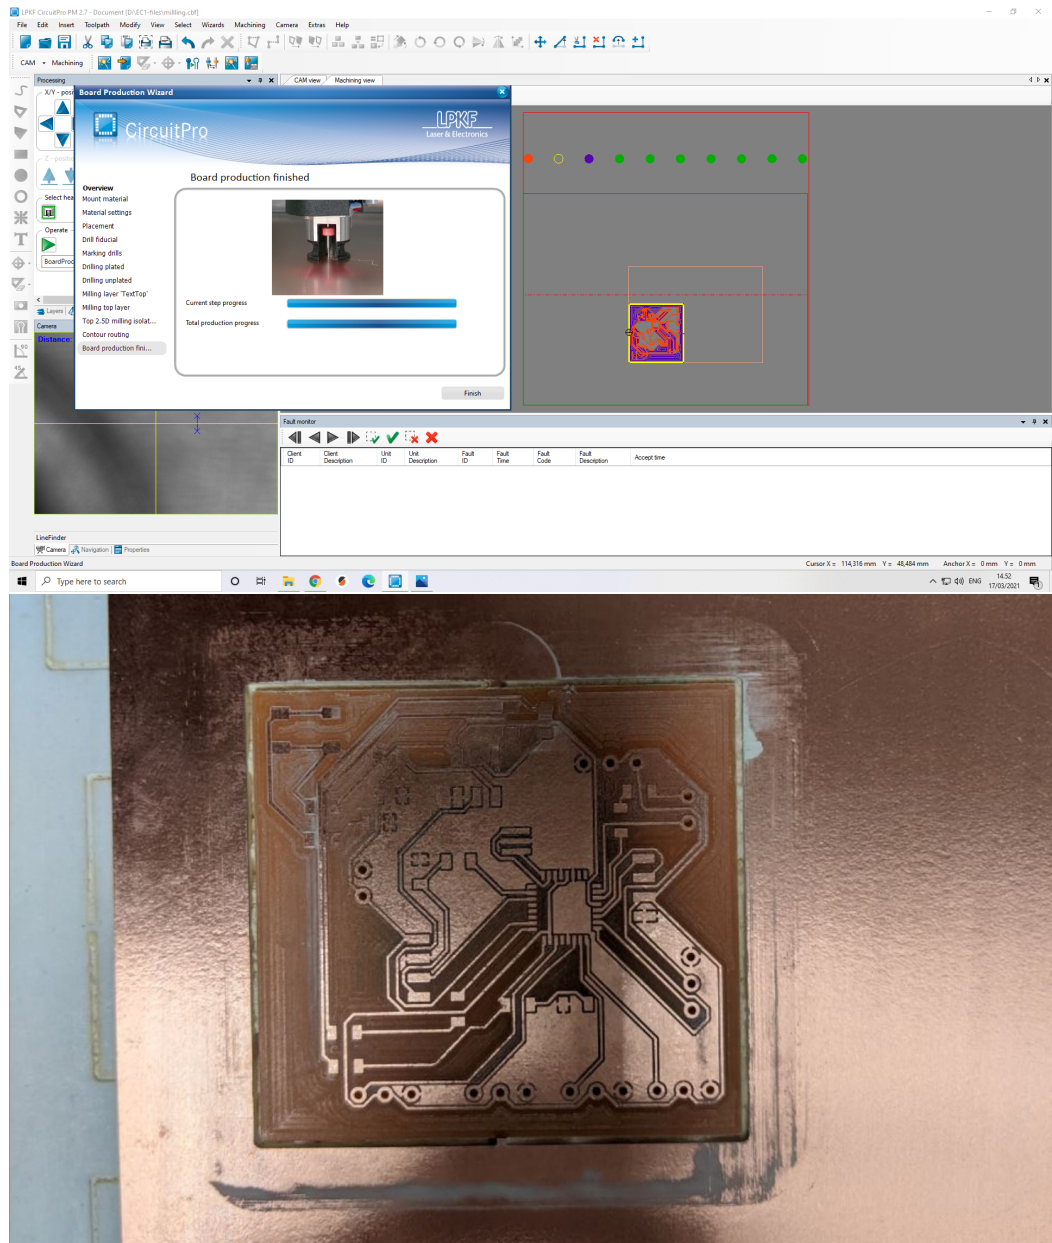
a)Milling progress in the software tool b)Milling progress on the machine side.
